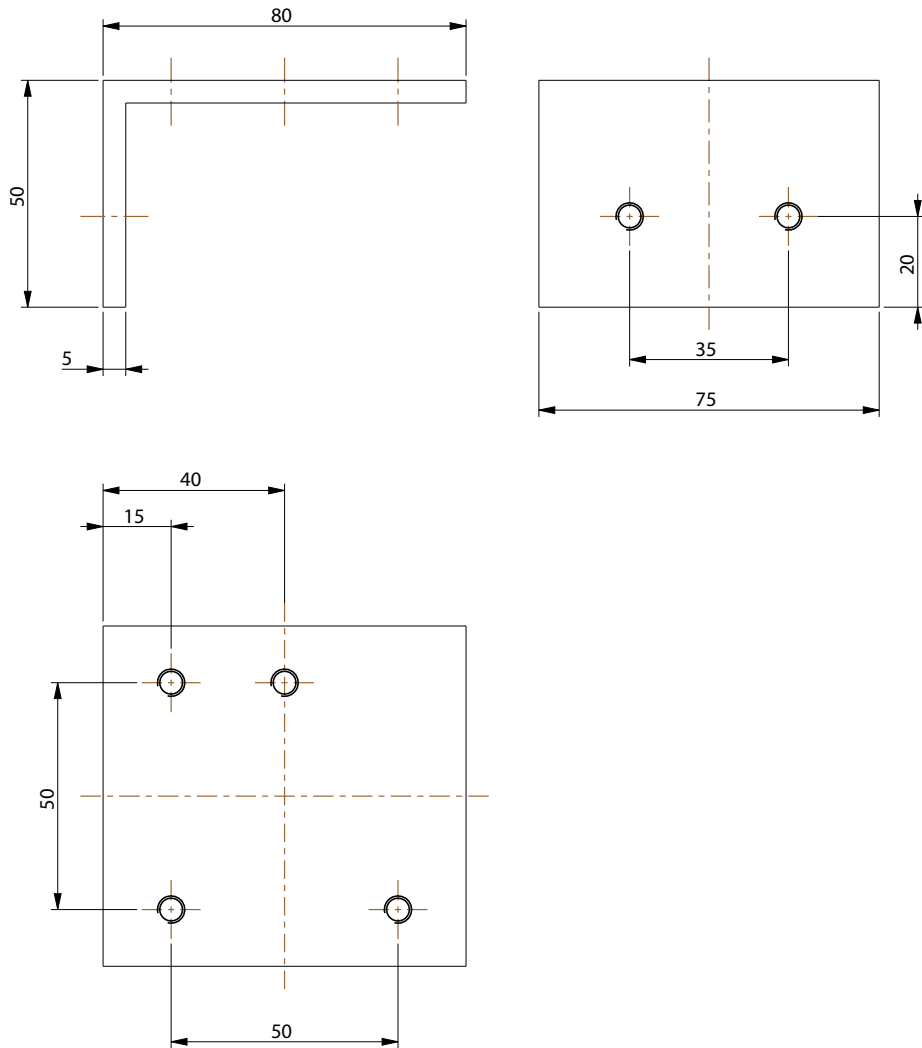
Design drawing of the rear panel. It is a 2 mm aluminium plate.
